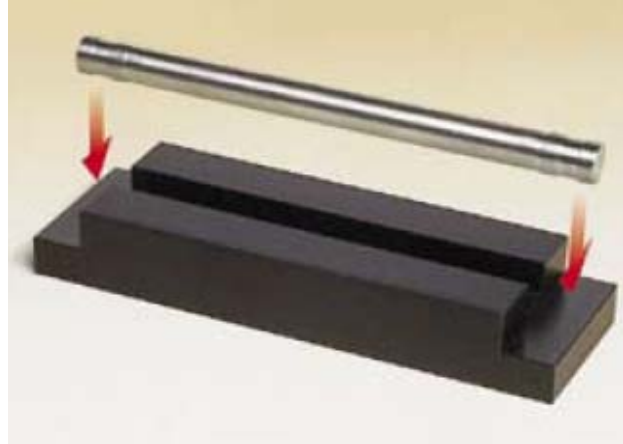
Spacing Bar and Welding Jig Provided to Assist in Correct Placement of End Blocks for Welding (from company website, www.geokon.com)
